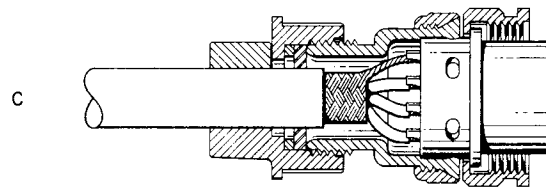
Installation of Connector P403 on Cable MCOS-3 and Shielded Cable for Audio Output and AGC
